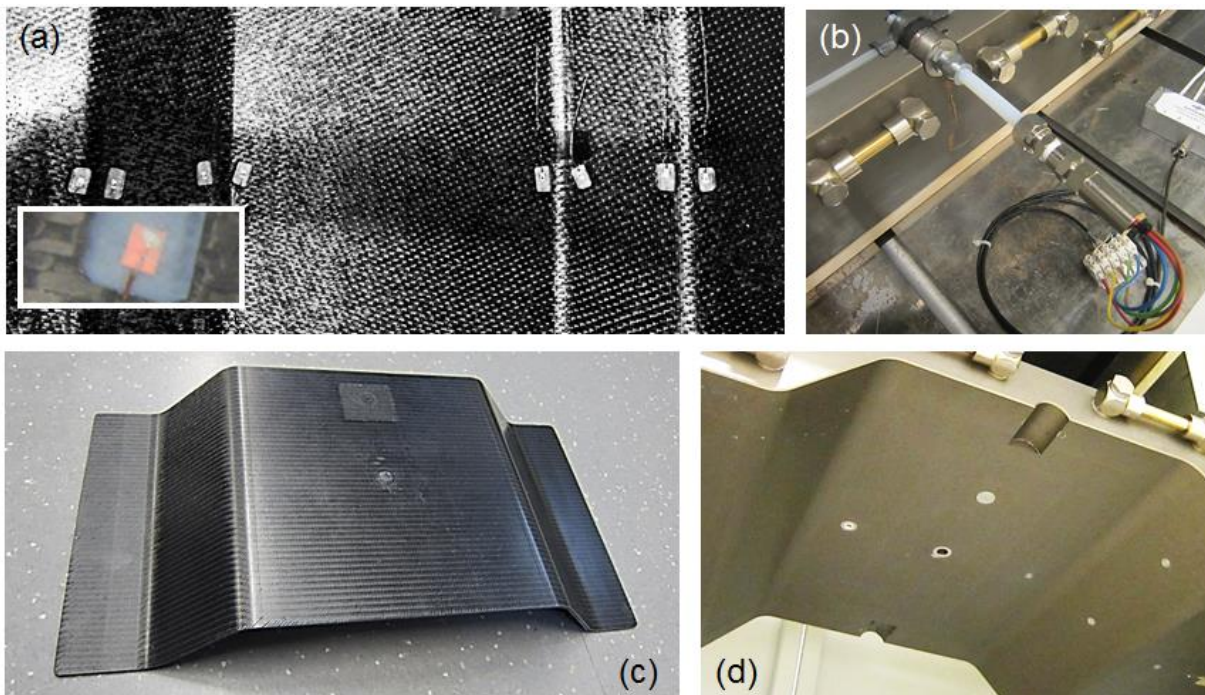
(a) Bottom surface of the produced part (image processing was used to make the sensors visible), (b) A vent being used as entry point for 4 EMFS, (c) the produced part and (d) the top RTM tool (mould-mounted sensors visible).
